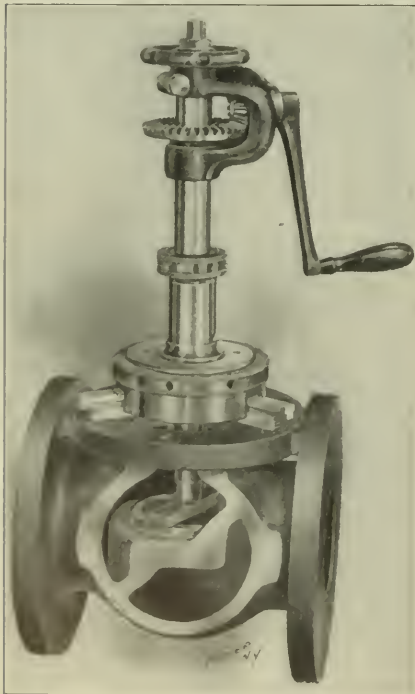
APPLIED TO LARGER GLOBE VALVES
